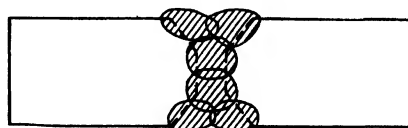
Bevel both sides of parts thicker than about $\frac{3}{8}$ in. where it is possible to weld from both sides.
